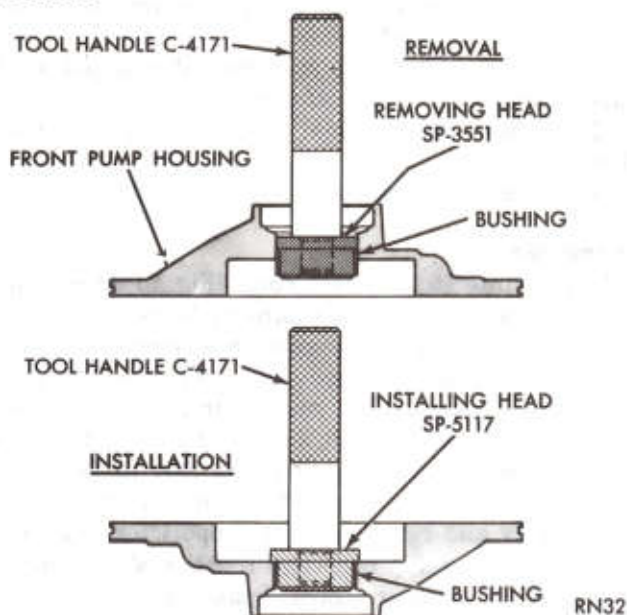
Replace Pump Bushing (A-904T and A-999)
